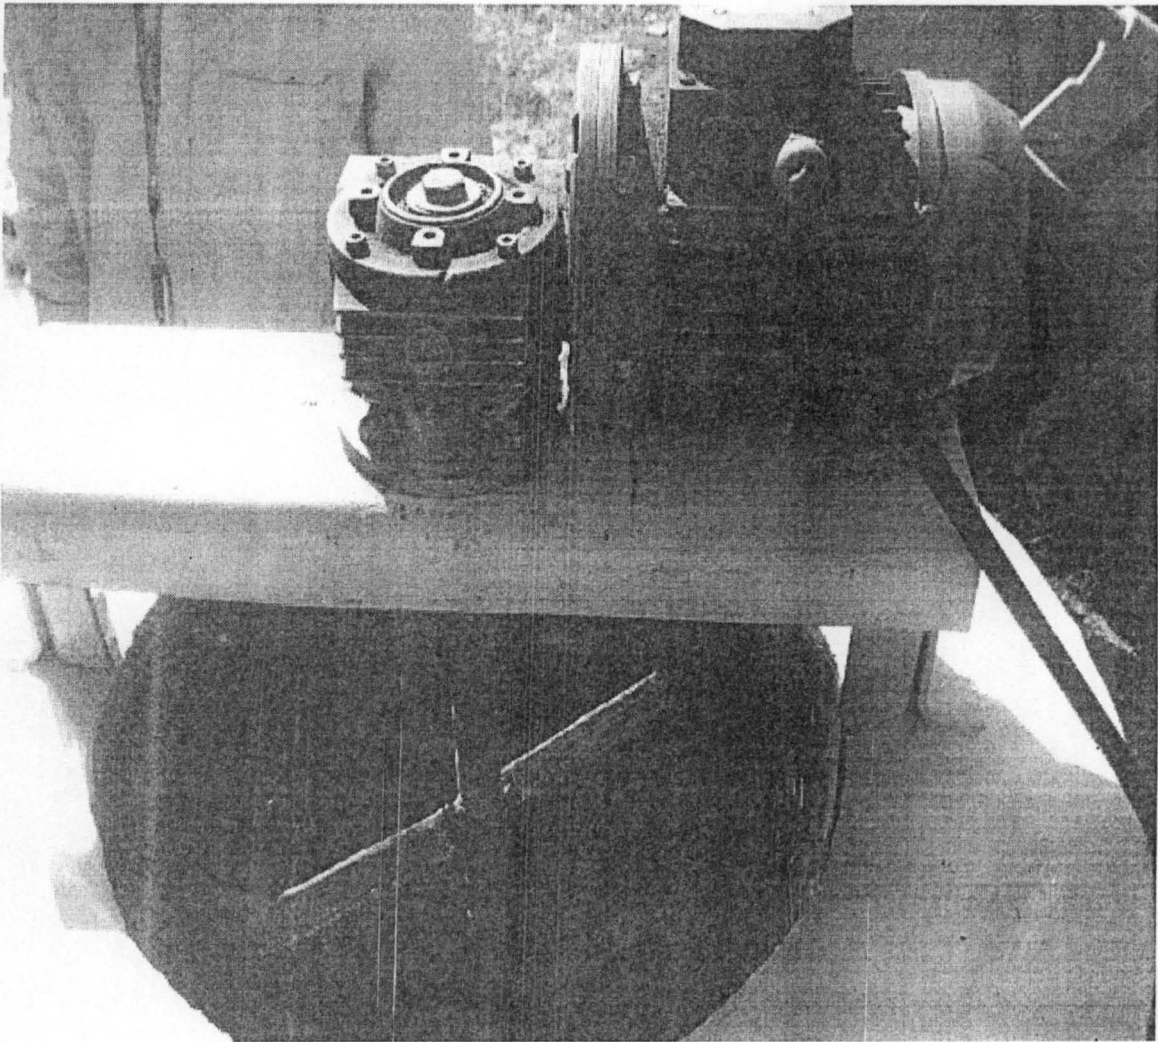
Picture showing Gear Motor, Electric motor, Shaft, and the stirrer.
